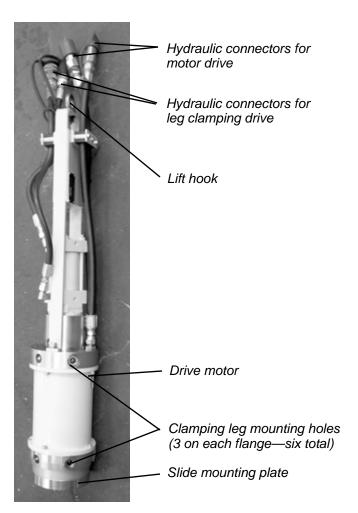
The photo illustrates the components of the ICC cutting machine.
